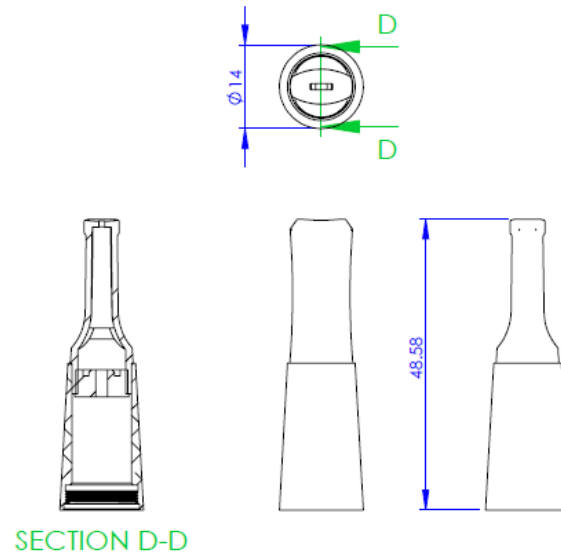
Diagram and dimensions of the Ghost - Mouthpiece. All dimensions are in mm.
